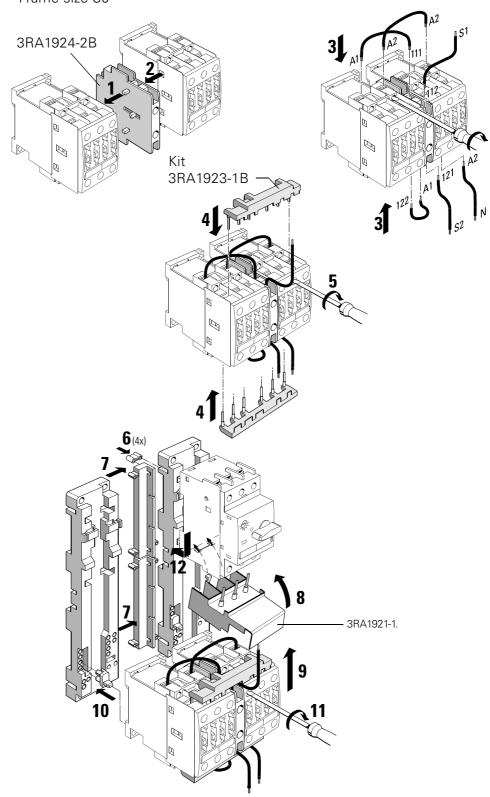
Self-assembly, rail, reversing operation (frame size S0)
